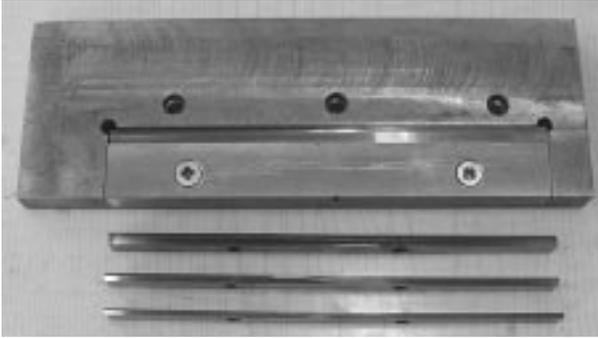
Tool segment used in experimental research of CWR in cold forming conditions
